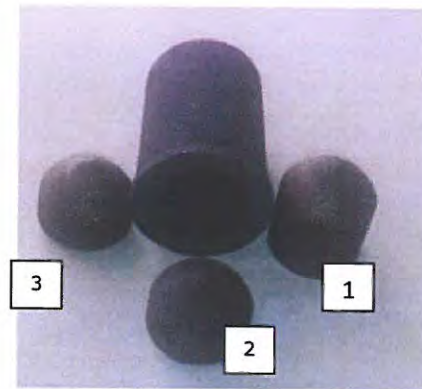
Graphite caster and deposited metal (DM) using coated rods.
